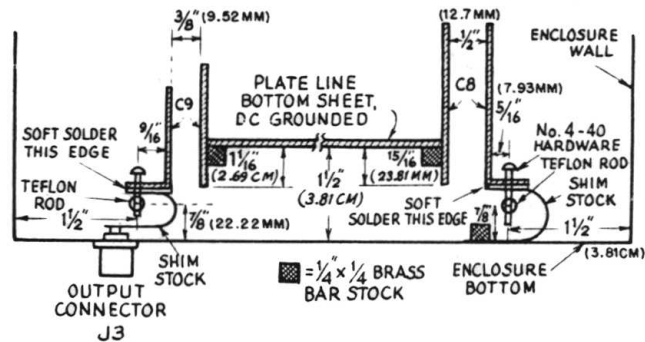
Relative positions and assembly information for the output coupling capacitor (C9) and the plate tuning (C8). Note that the shim stock is soldered to the movable vanes, and that the assembly is fastened to the Teflon shafts with No. 4 screws. The brass bar stock helps to provide a good ground connection between the shim stock of C8 and the chassis.
